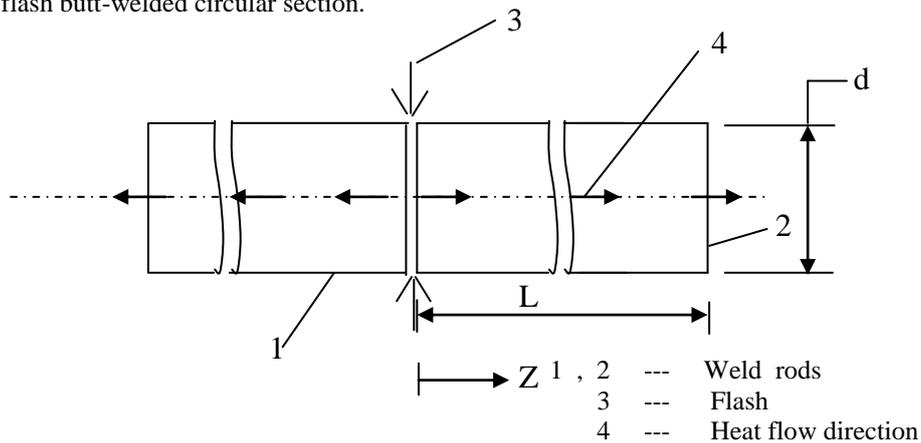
Schematic diagram of a flash butt welding process
